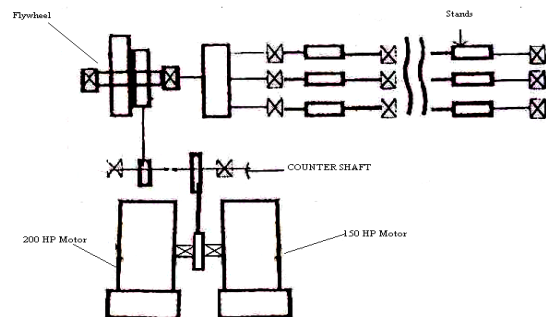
Design of rolling mill with motor on both sides of the main drive (concept two)
